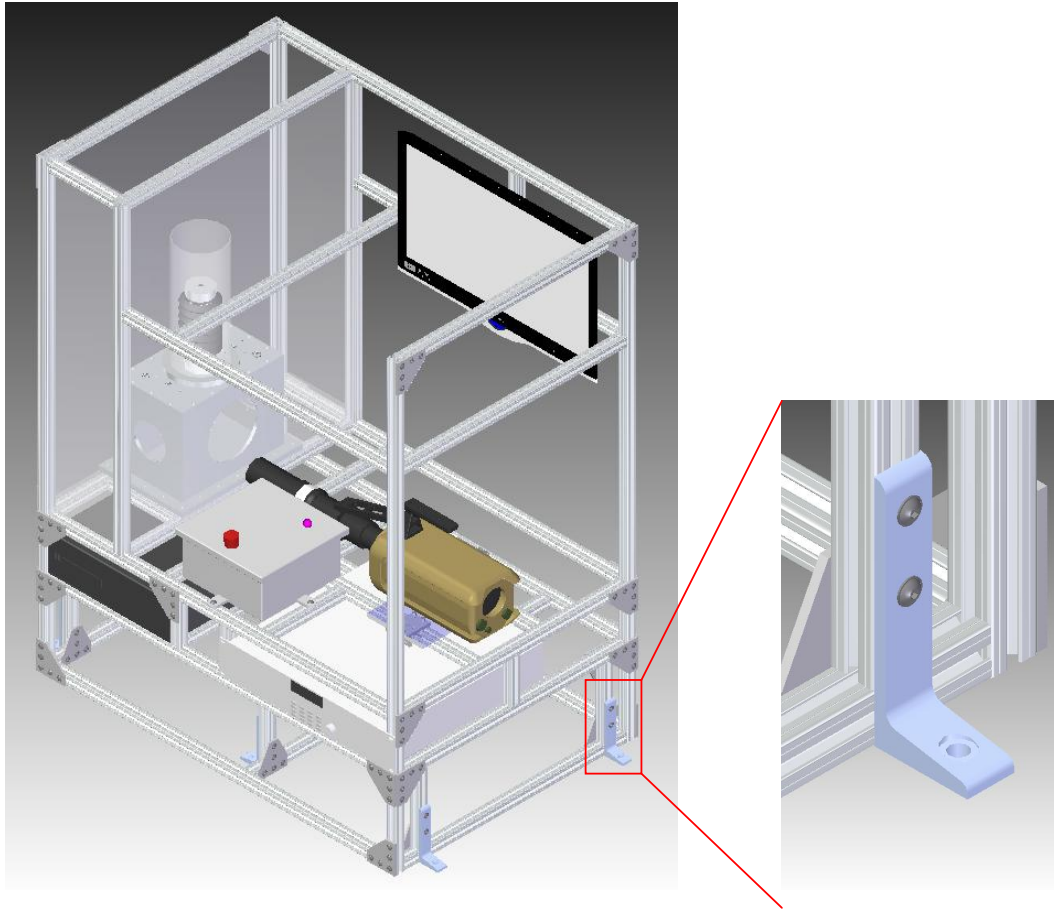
Isometric view of the equipment frame. Inset shows the floor mounting attachment for the AN-6 bolt.
